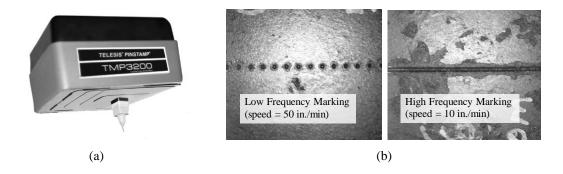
(a) Telesis TMP3200/470 marking head and (b) marked steel surfaces
